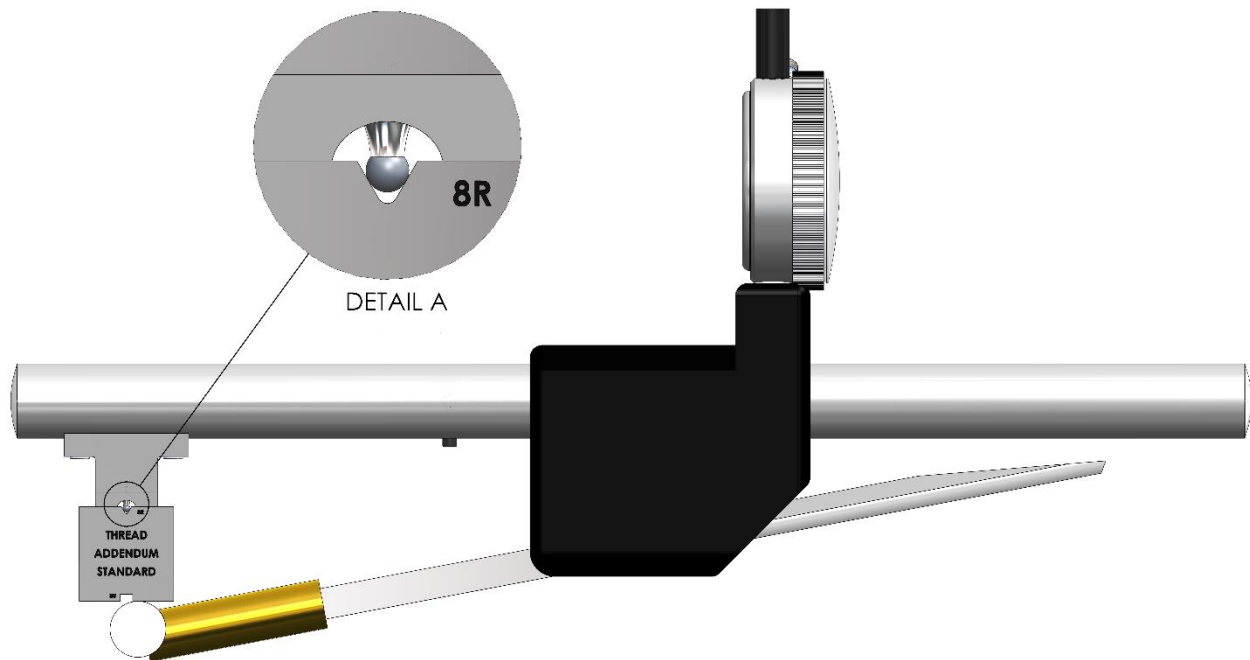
Internal Addendum Gauge on Setting Standards (8R and 10R Addendum Gauge on Block)
